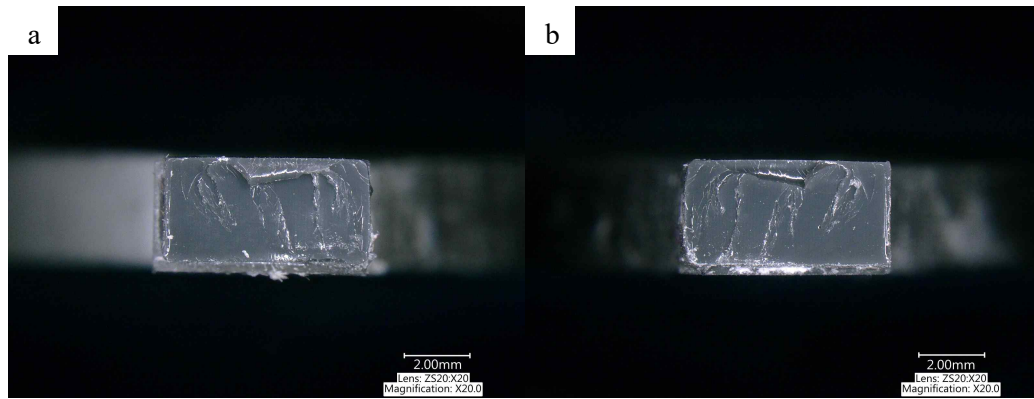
Polymer welded clear-flexible specimens after tensile testing (a) high temperature half and (b) flexible half.
